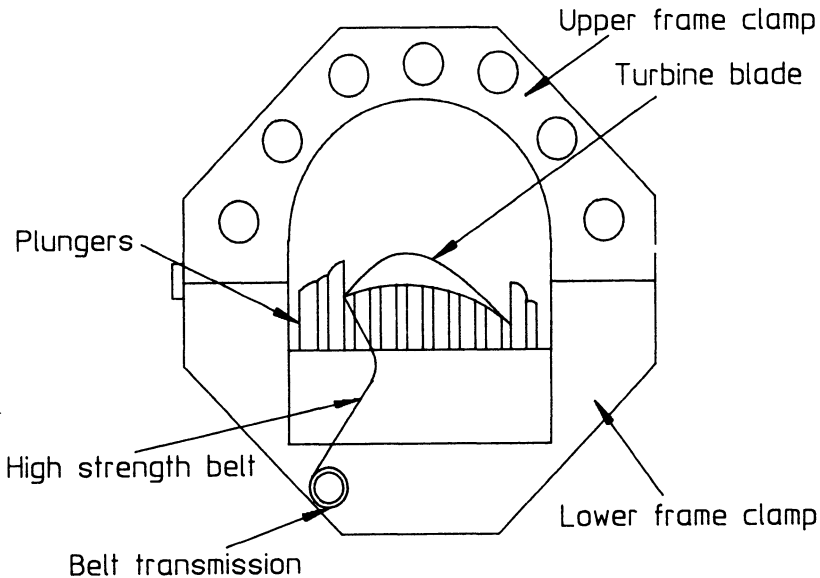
A turbine blade held in flexible clamps [1] (Courtesy of ASME)
